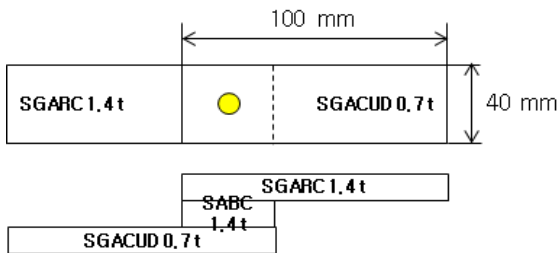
Schematic drawings of a three sheet of tensile test sample geometries.
